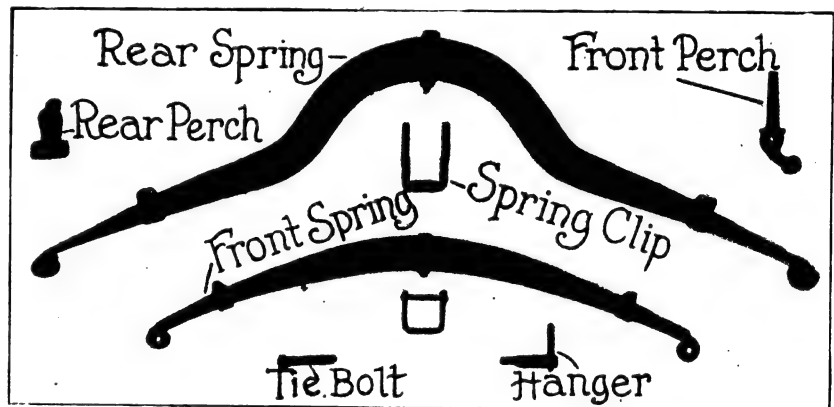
Showing the Front and Rear Spring Assembly of the Ford Car Which Differs Radically from Conventional Practise.
